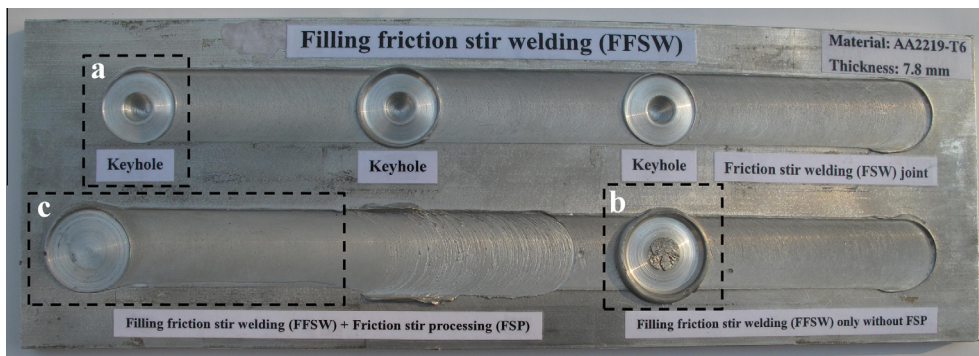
Dissimilar AA2219/AA7075 FFSW plates with (a) FSW keyhole defects, (b) repaired keyhole and (c) repaired keyhole after FSP.
